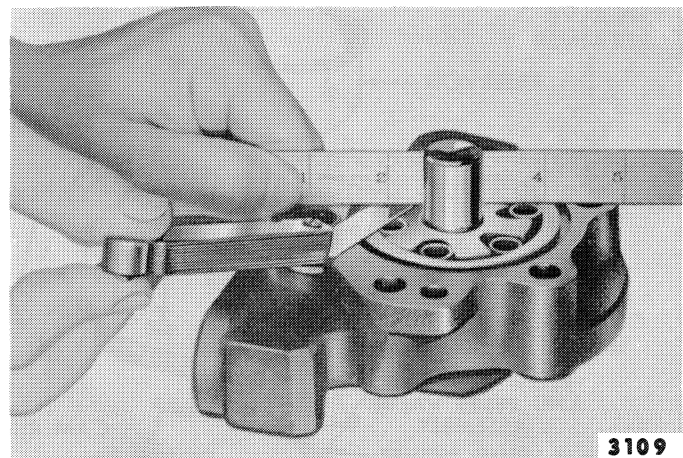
Checking Clearance of Carrier and Rollers in Pump Body
